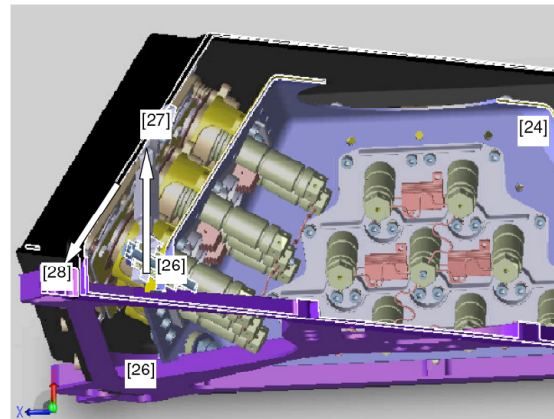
Needle FEEP Cluster Assembly section. Cold assembly [27], hot assembly [24] and S/C interface [26]
